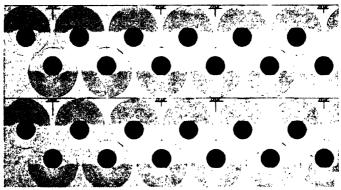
A large manufacturer of dolls' eyes buys flat steel sheets lacquered and lithographed with hundreds of the eye designs in color. These he stamps and forms into the finished eye shell without surface injury.
